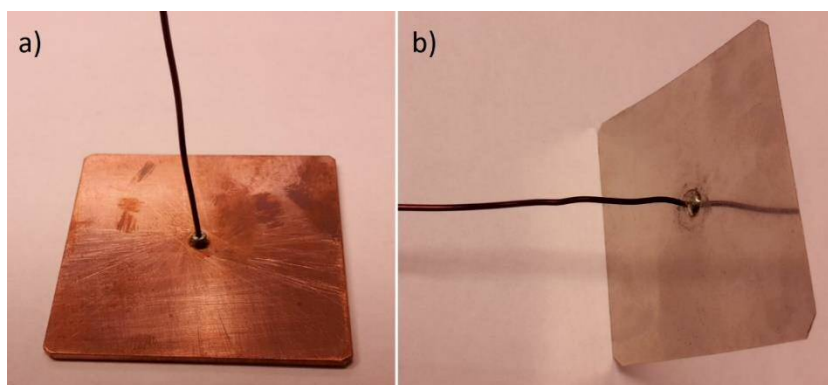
a) Copper plate welded to a copper wire, b) stainless steel plate welded to a copper wire.
